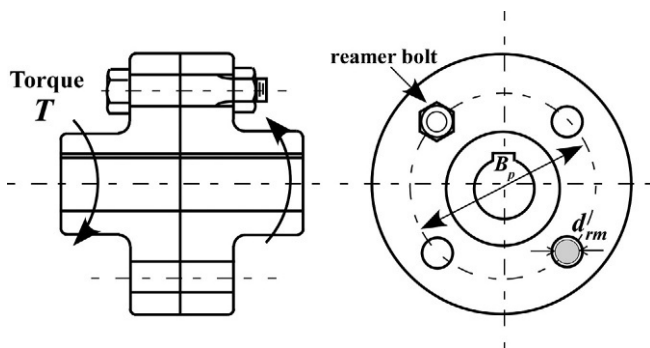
Rigid flanged shaft coupling specified in JIS B1451.
